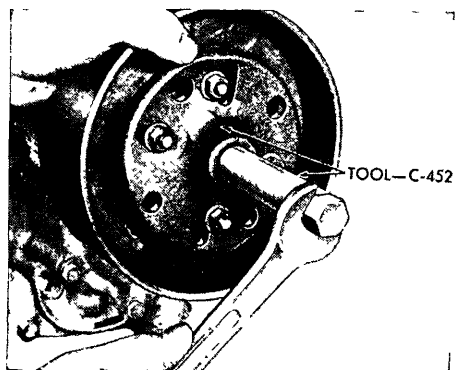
Removing propeller shaft flange, 1946-52 automatic transmission
